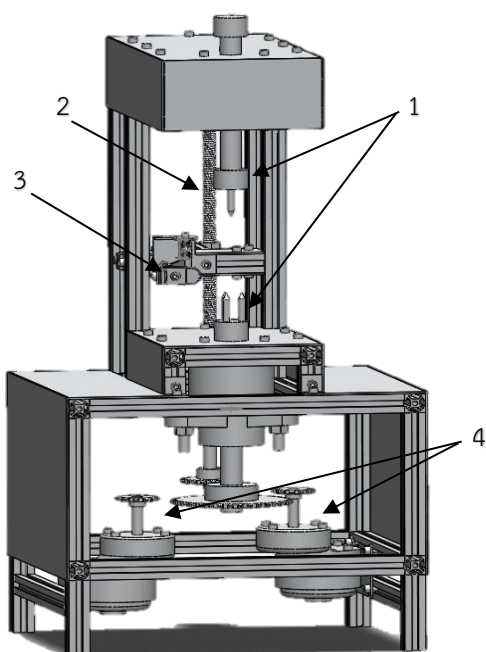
The pickled mango peeling machine using fruit rotating shaft.
